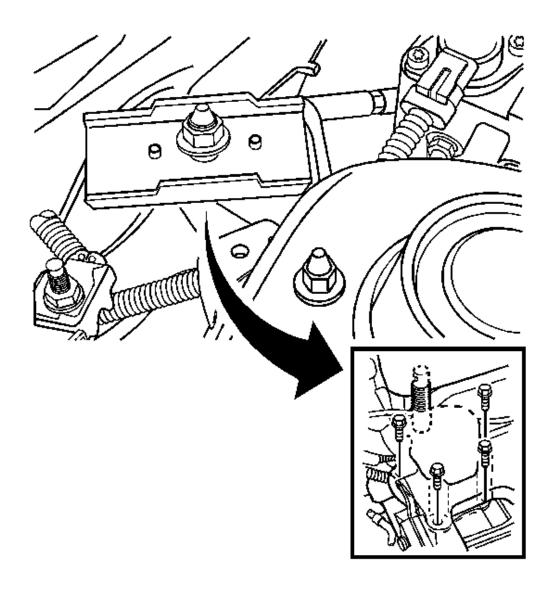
View Of Oil Cooling Lines & Bolt Courtesy of GENERAL MOTORS CORP.
